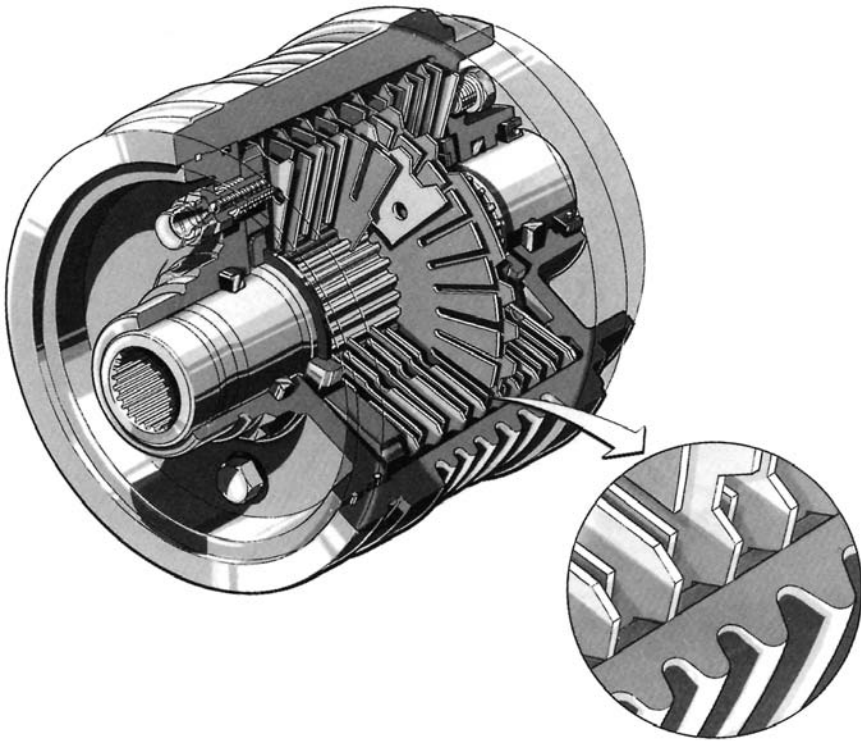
Visco clutch with slip-dependent drive moment distribution. Two different packages sit in the closed drum-shaped housing: radially slit steel discs, which are moved by the serrated profile of the hollow shaft, and perforated discs which grip (as can be seen below) into housing keys. The shaft is joined with the differential and the casing with the propshaft going to the rear axle.
